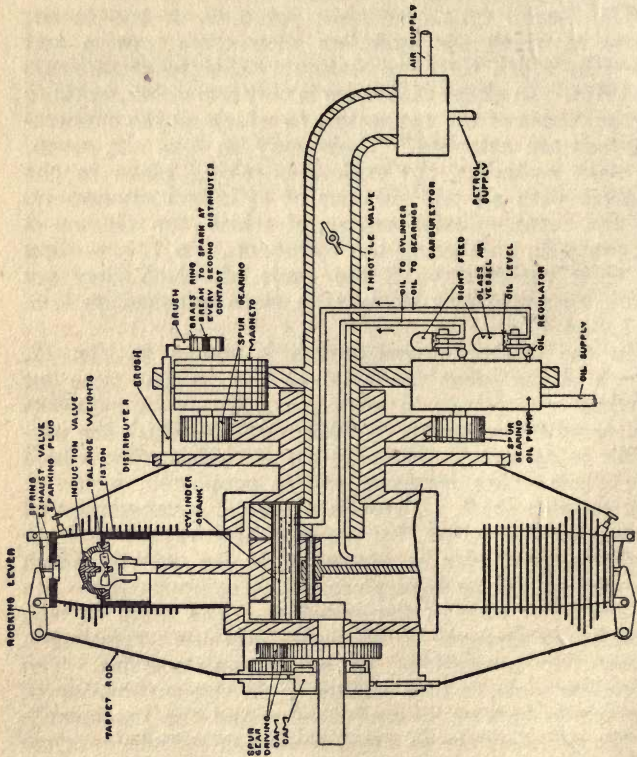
A diagrammatic detailed view of the Gnome engine, showing the working arrangements.
